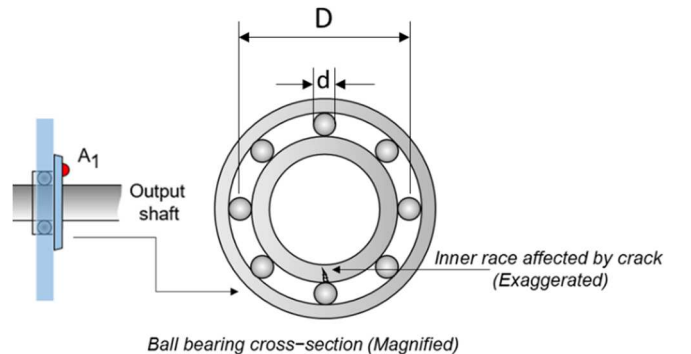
SKF 6202 ball bearing cross-section showing design parameters
